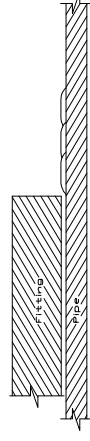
Encirclement Split Tee fitting Welding sequence
